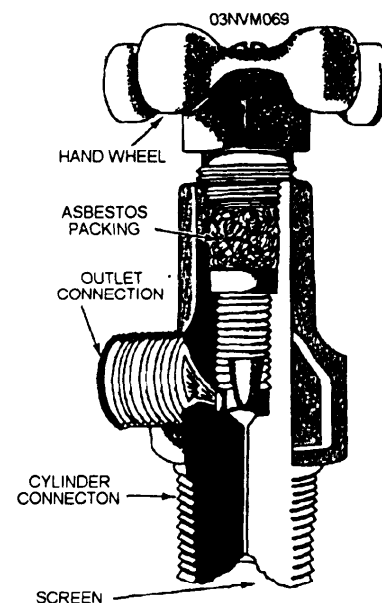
Cutaway view of an acetylene cylinder valve showing asbestos packing.
